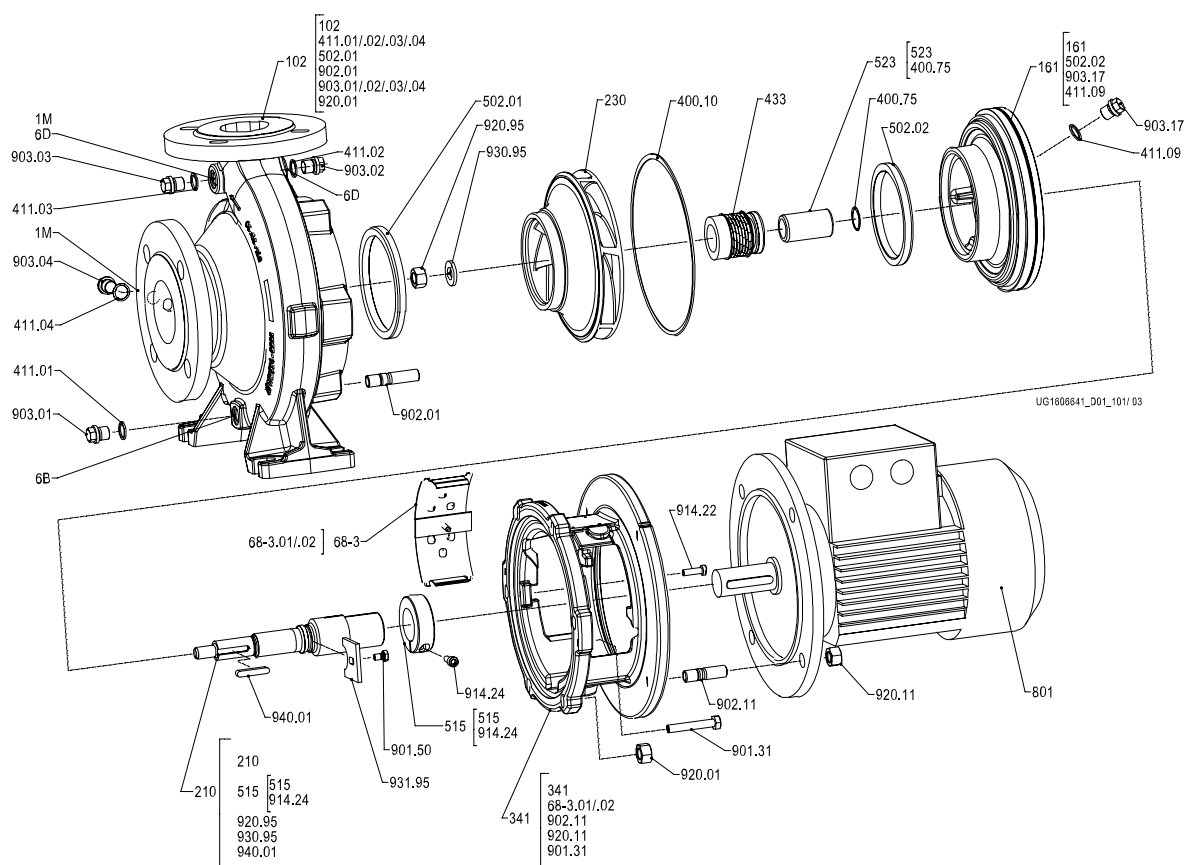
Version with single mechanical seal and clamped casing cover, with pump foot
